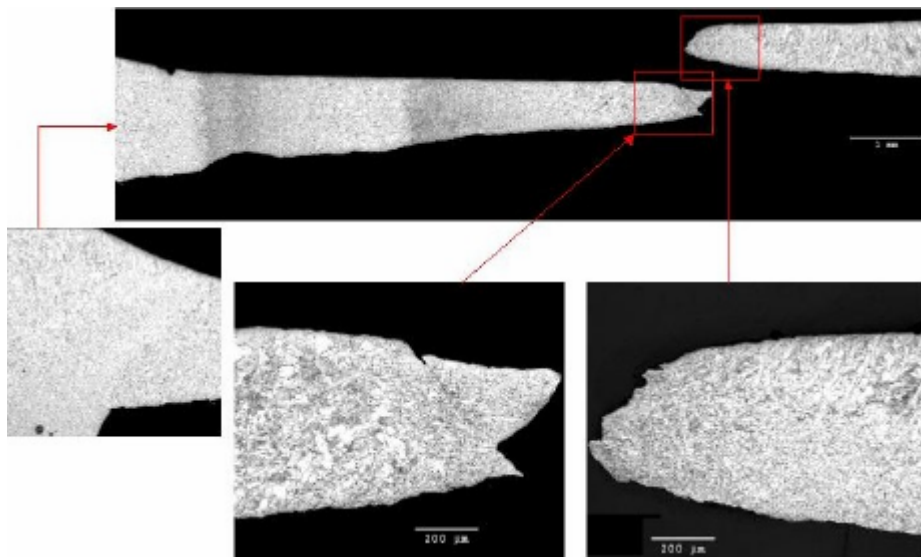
Metallographic cross section of tear #8-2. This sample contained the primary weld, plus a second weld approximately 13 mm in from the primary weld. This secondary weld was apparently made to repair the liner where it had been ground through when repairs were being made to the primary weld, similar to sample #4-3. Tearing occurred adjacent to the secondary weld in what appears to be recrystallized weld metal. Substantial localized plastic deformation accompanied tearing.
